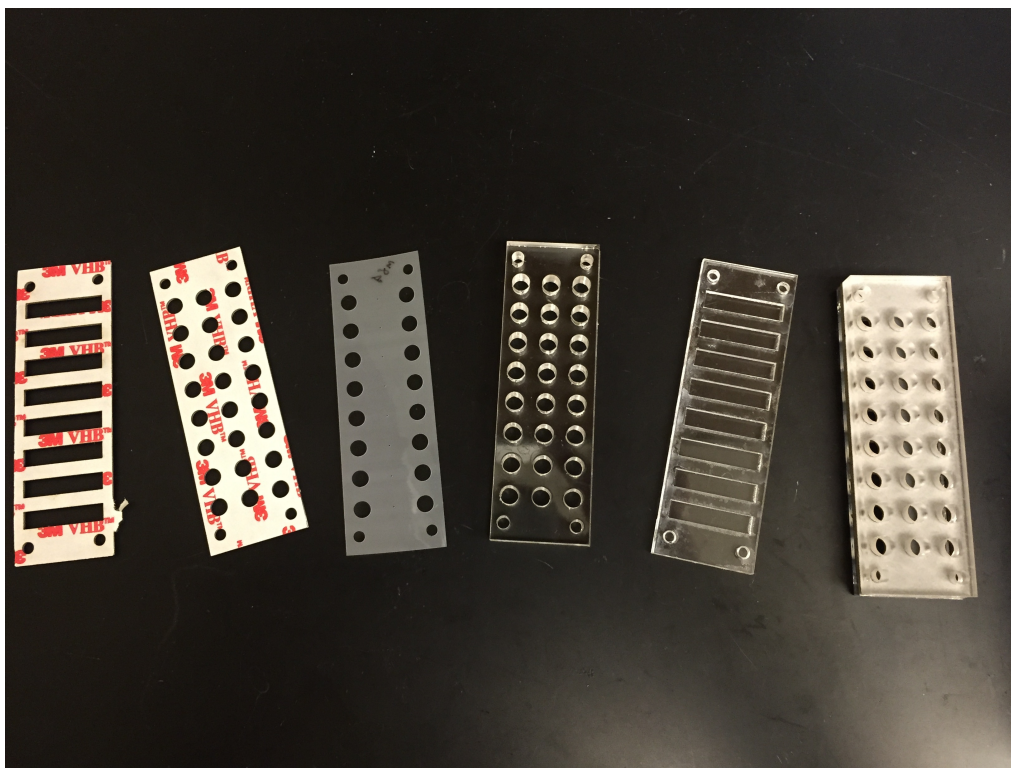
Chip Assembly. From left to right: bottom tape, top tape, partition, top acrylic, bottom glued acrylic, assembled chip.
